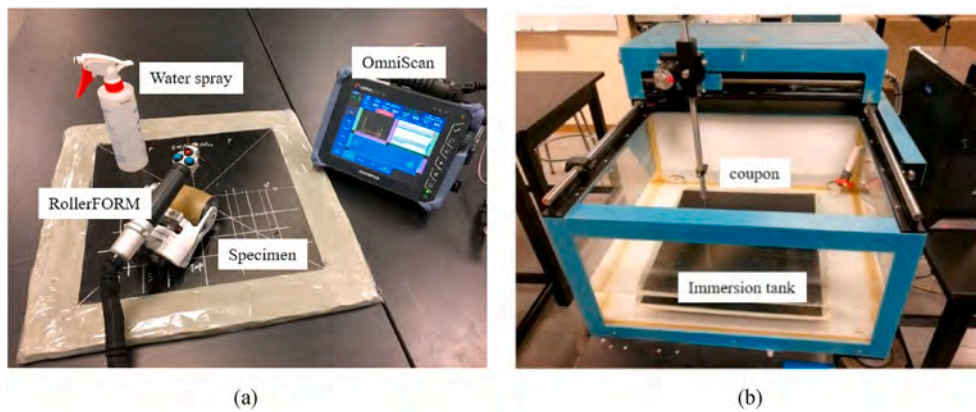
UT scans were performed using (a) RollerFORM inspection (b) Immersion tank inspection.
